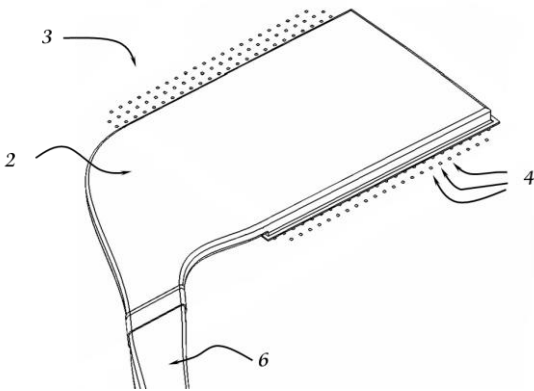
Roof outlet (2), ceiling (3) perforated with holes (4), air duct from B-pillar (6)
